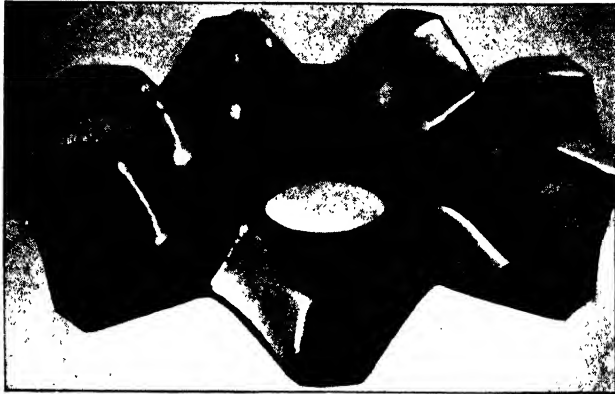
Automobile wheel made by welding together component pieces blanked, drawn and pressed from sheet steel.
